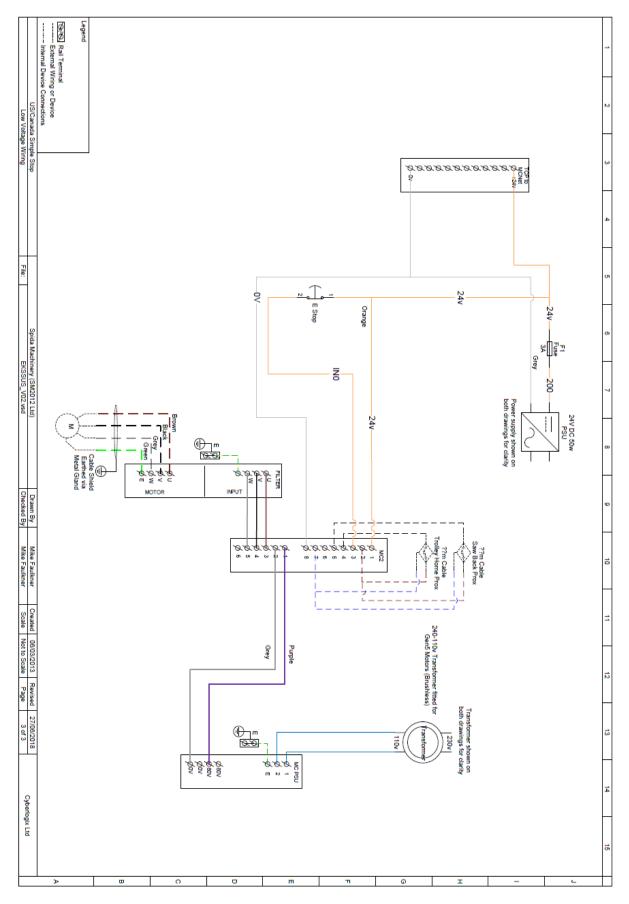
, Gen 1 Simple Stop Electrical drawings – US Version, pg 3
